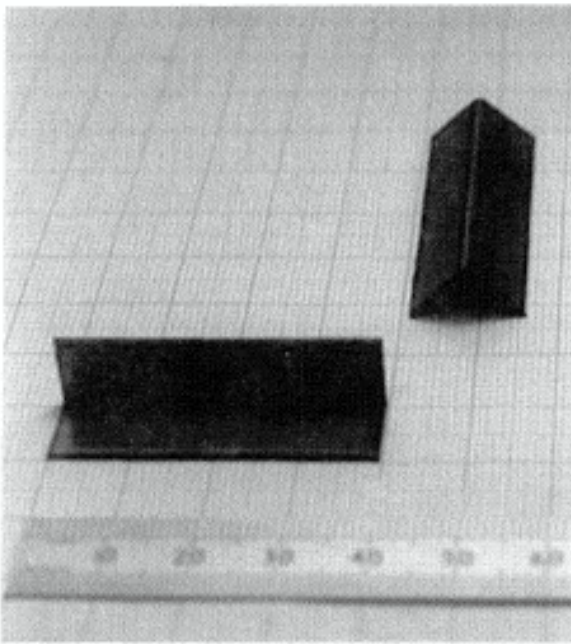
Typical Bend in 1mm and 2mm Thick Sheet
